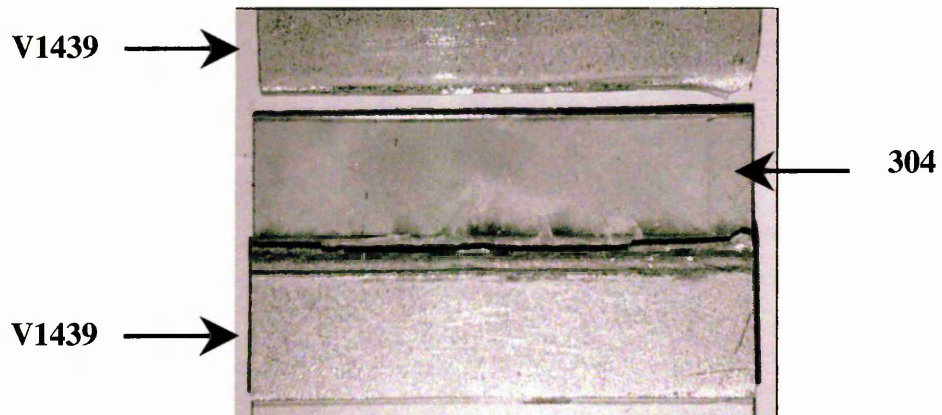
Shows a fatigue specimen in which fatigue failure occurred in the V1439
